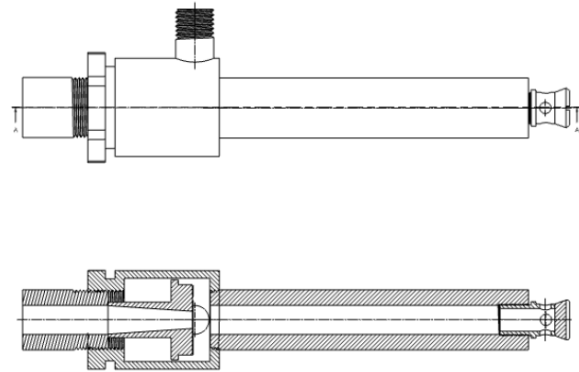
Top View Of The Tube With Sections Showing The Turbulator Section
